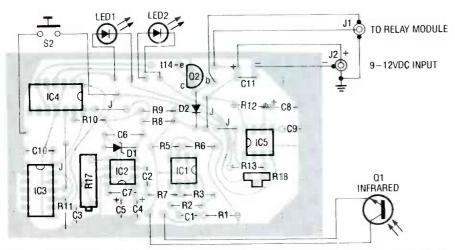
STUFFING THE IR-RECEIVER PC BOARD should present no special problems.
